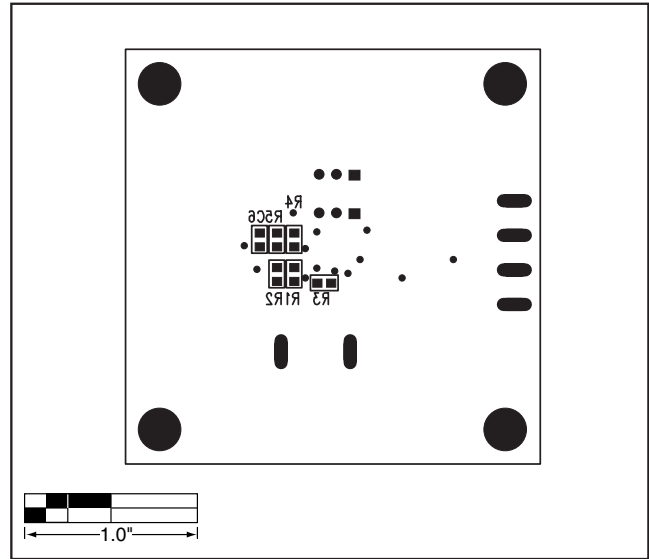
MAX1760 EV Kit Component Placement Guide—Bottom Silkscreen
